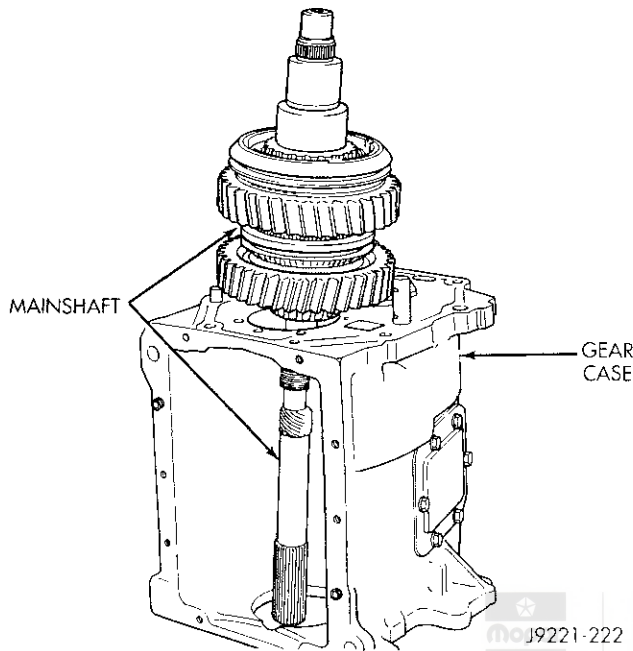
Mainshaft Positioned For Gear And Synchro Installation
